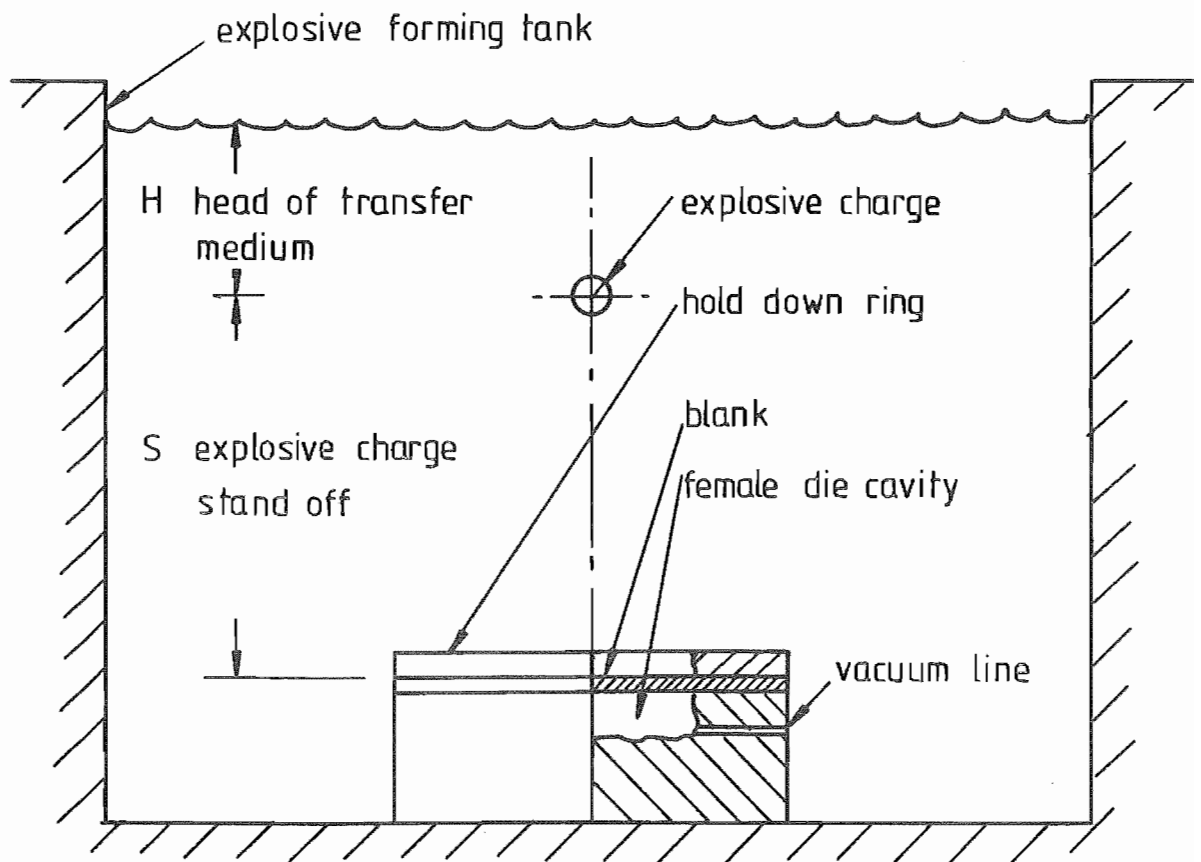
STAND-OFF EXPLOSIVE DIE FORMING
